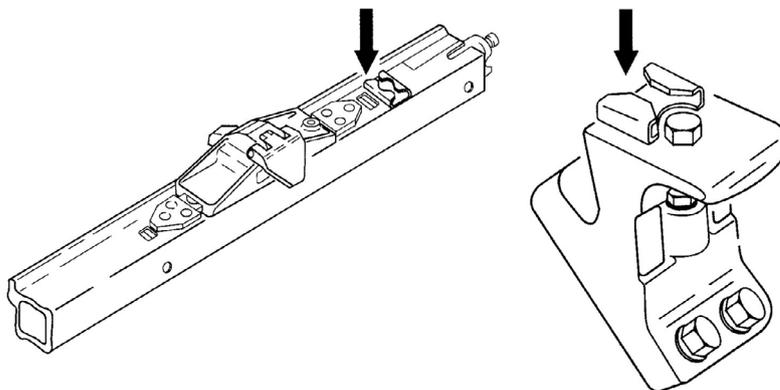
Example of Tie-down Attachment Points on Track and Anchor Plate
